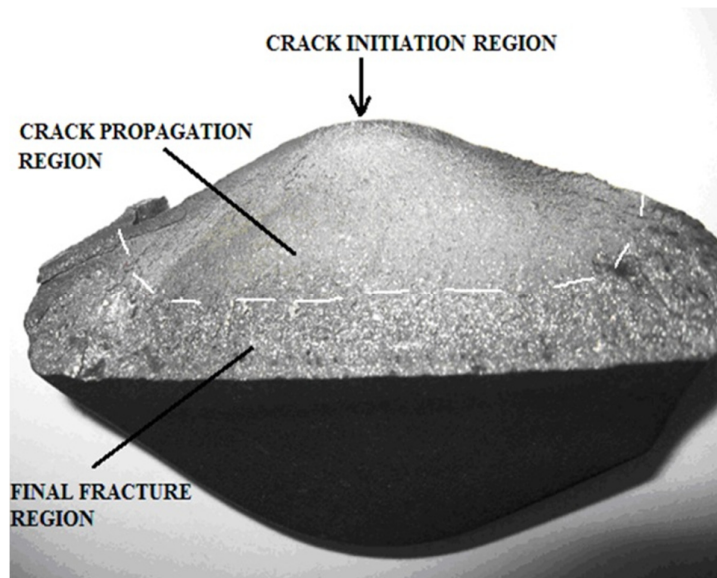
Crack surface from a fully fractured test specimen from EN-GJS 800-2 crankshaft rolled at 15kN.
